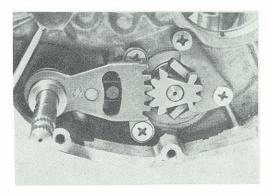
Aligning center of sector with gear shifting pawl holder
